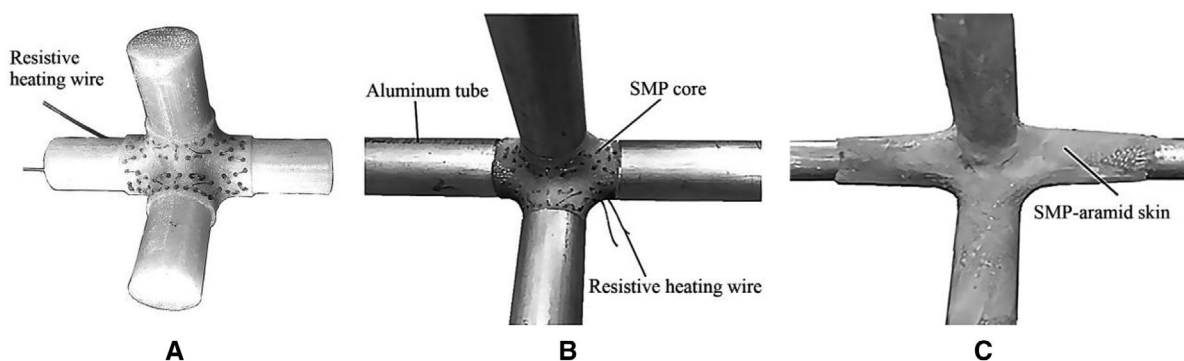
(A) SMP joint core; (B) joint connected to four aluminum tubes; (C) SMP-aramid skin<sup>29</sup>
